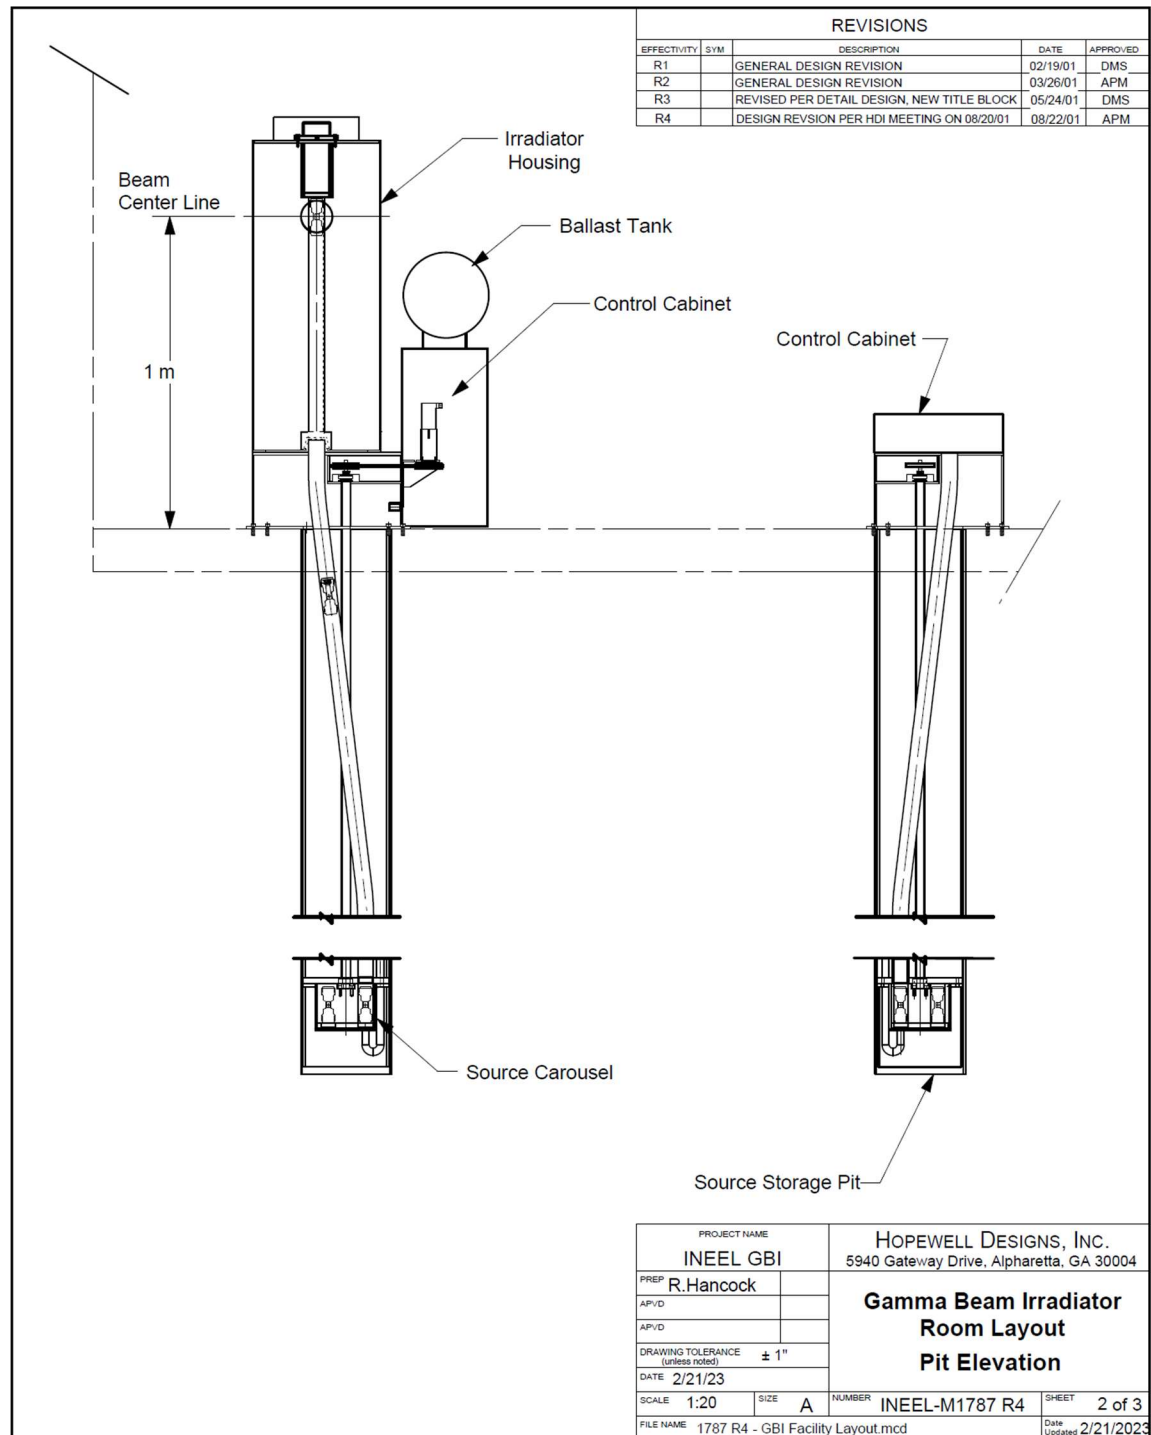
Gamma Beam Irradiator Room Layout Pit Elevation (Hopewell Designs, INC.) [12]
